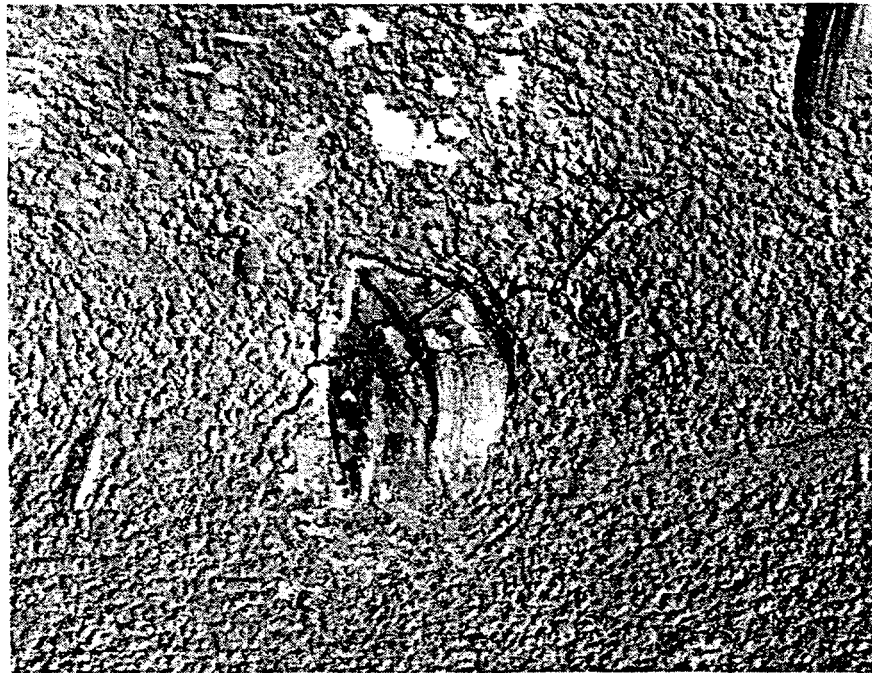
"Star-burst" crack on surface of spout opening tube damaged by rodding.
